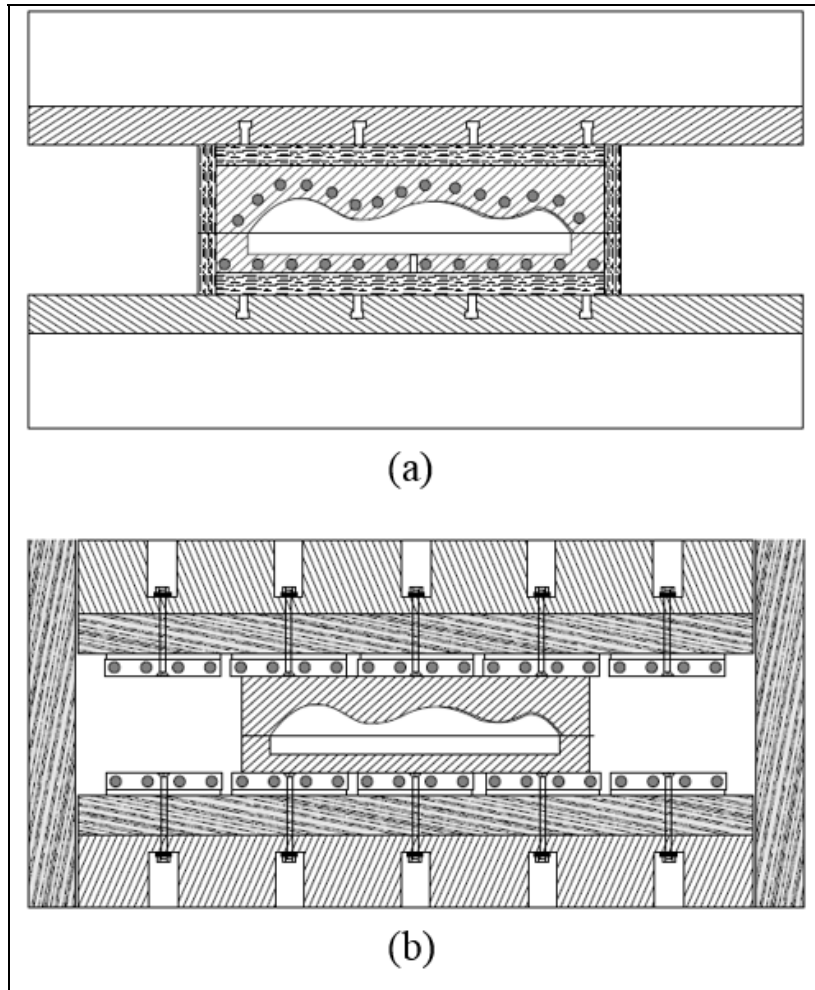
Installed heating elements in a SPF/HSBF tool
